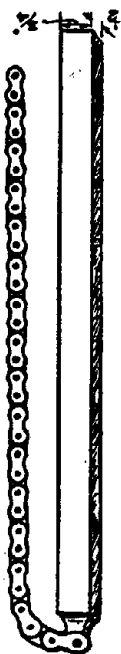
CHAINBAR FOR USE WHEN REMOVING GEARBOX SPROCKET NUT.
